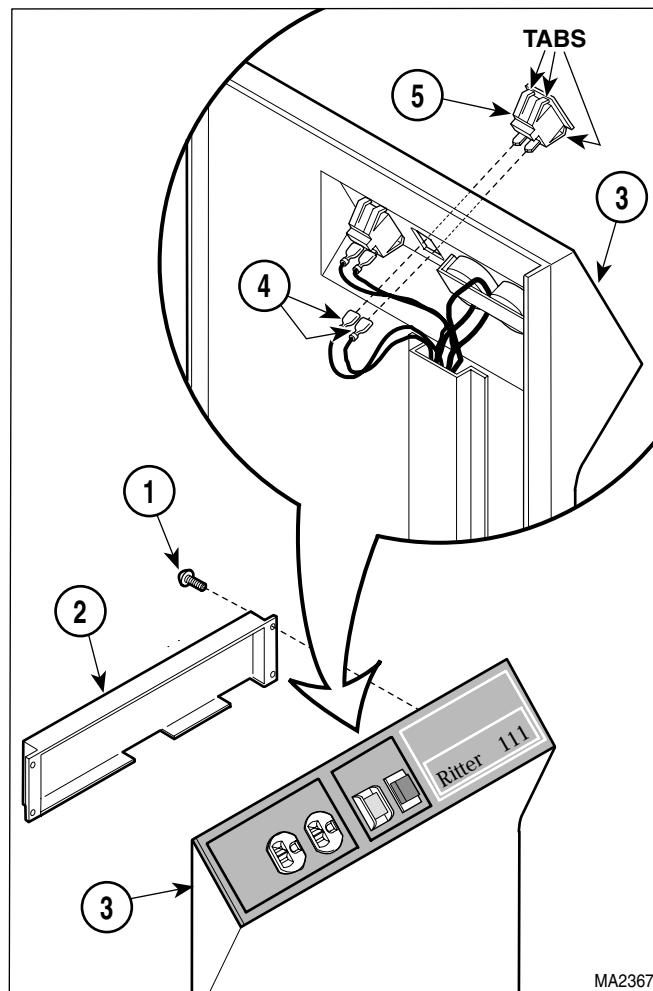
AUTO RETURN "RETURN" Button or "STOP" Button Removal / Installation
